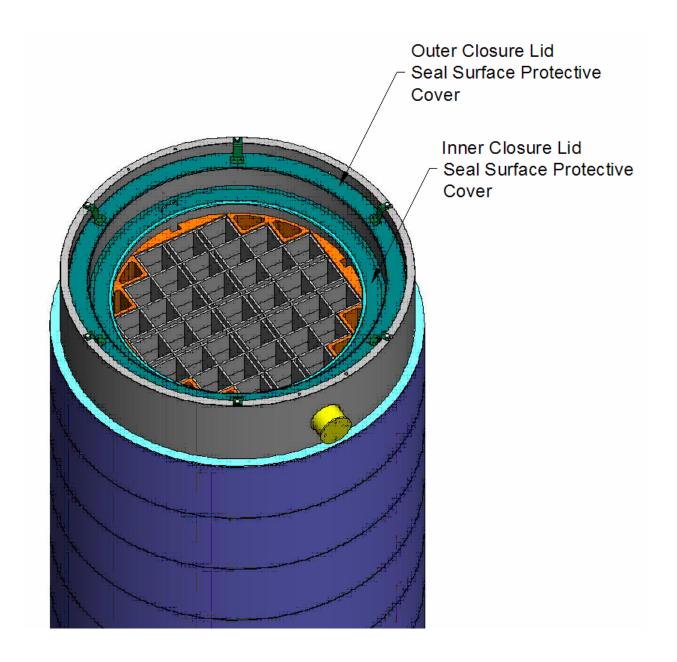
A.3: HI-STAR 180 SHOWN WITH INNER AND OUTER CLOSURE LIDS REMOVED AND SEAL SURFACE PROTECTIVE COVERS INSTALLED ON THE CONTAINMENT CLOSURE FLANGE (SEAL SURFACE PROTECTORS SHOWN FOR EXAMPLE ONLY AND MAY VARY IN ACTUAL CONFIGURATION DETAILS)
